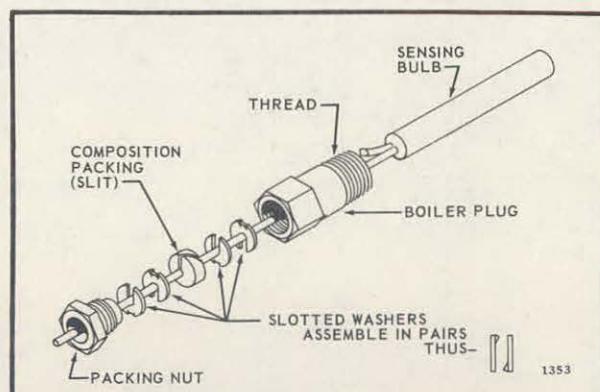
COMPRESSION FITTING FOR PRESSURE TIGHT MOUNTING OF SENSING ELEMENT.
